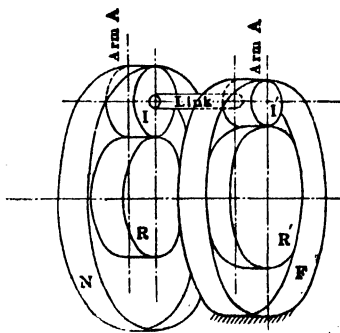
An epicyclic train consisting of two central gears, one arm carrying two planetary gears, and two internal gears, one of which is fixed.
